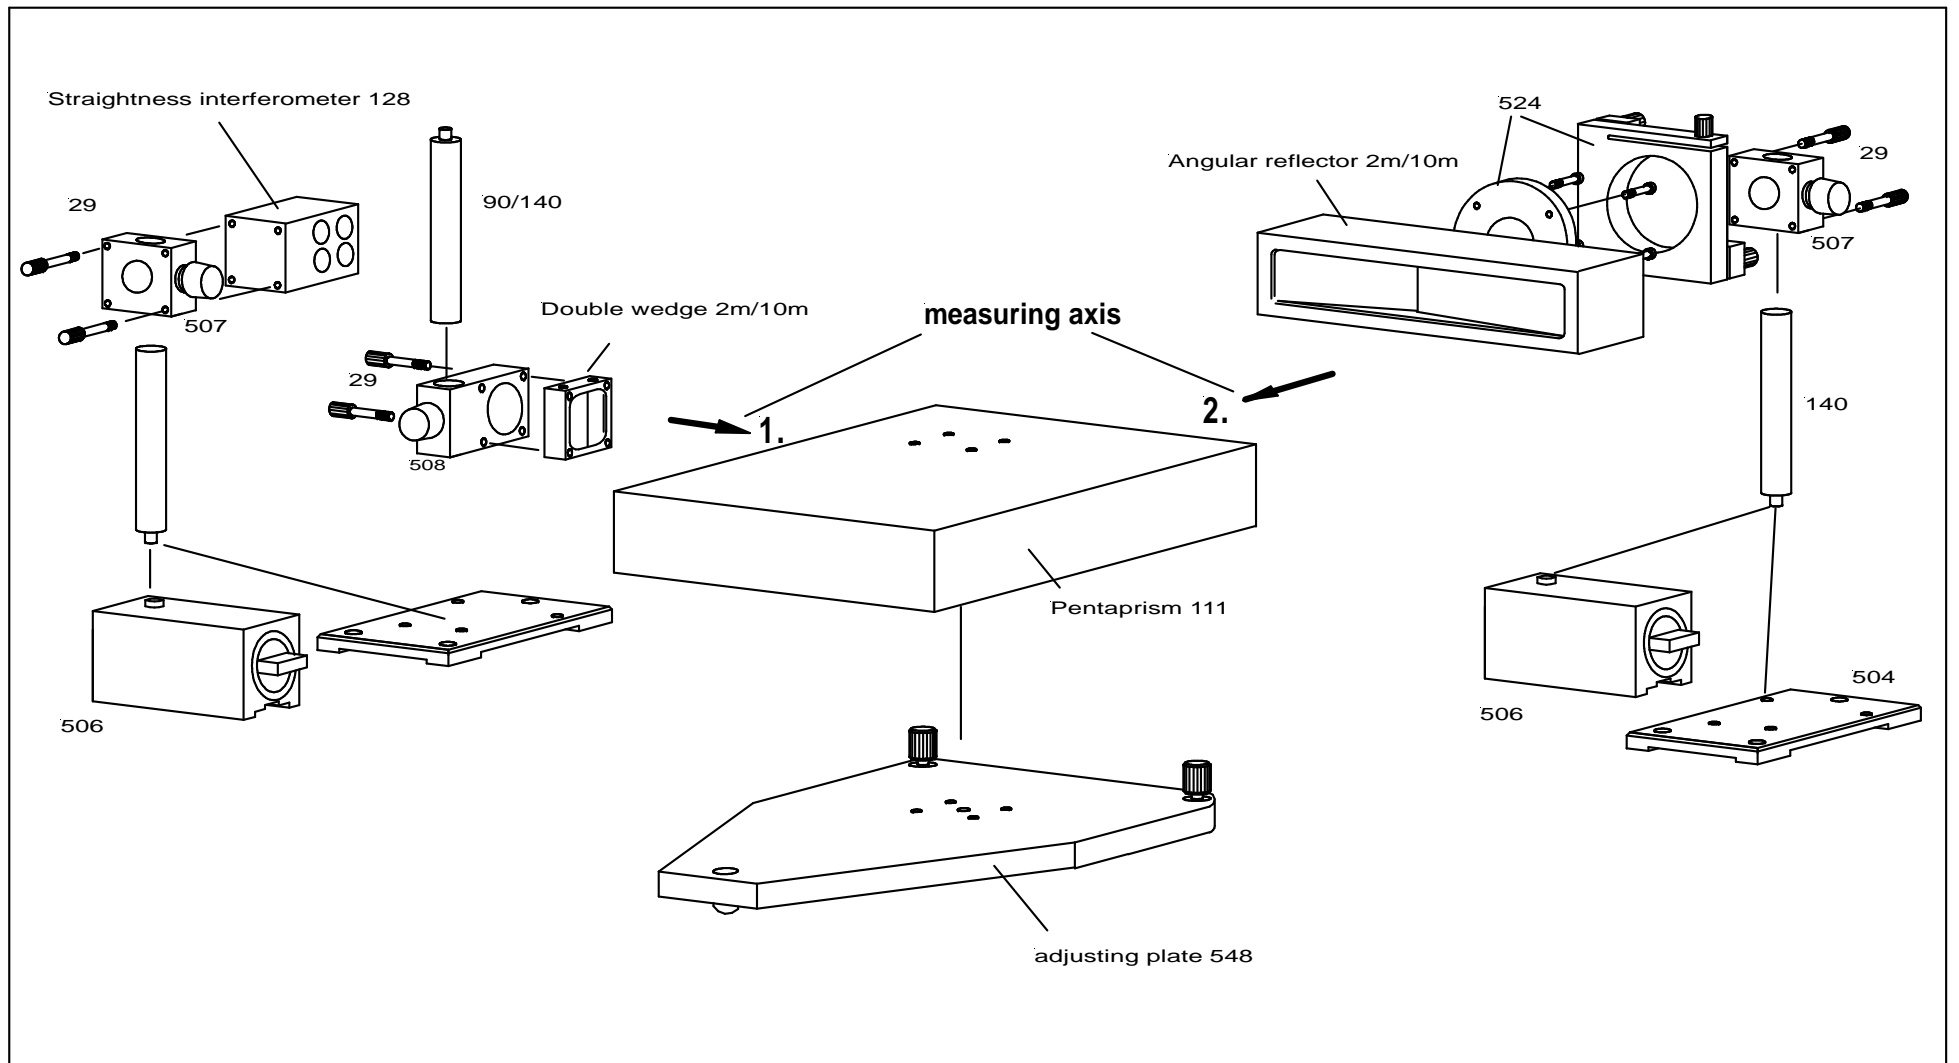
Squareness Interferometer, horizontal configuration (assembly drawing)
